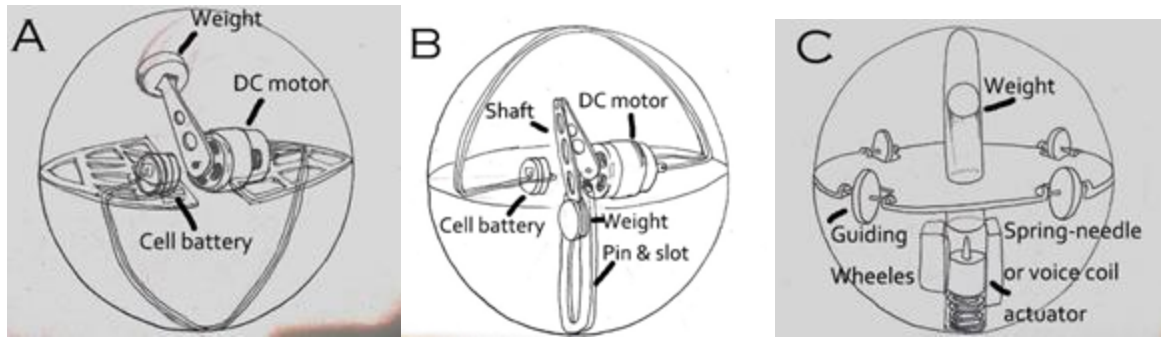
A) Prototype 1 concept sketch. Pure rotation vertically. B) Prototype 2 concept sketch. Slider & crank mechanism. C) Prototype 3 sketch. Spring or magnetic coil, with potential reorientation of the plane perpendicular to the prismatic motion.
